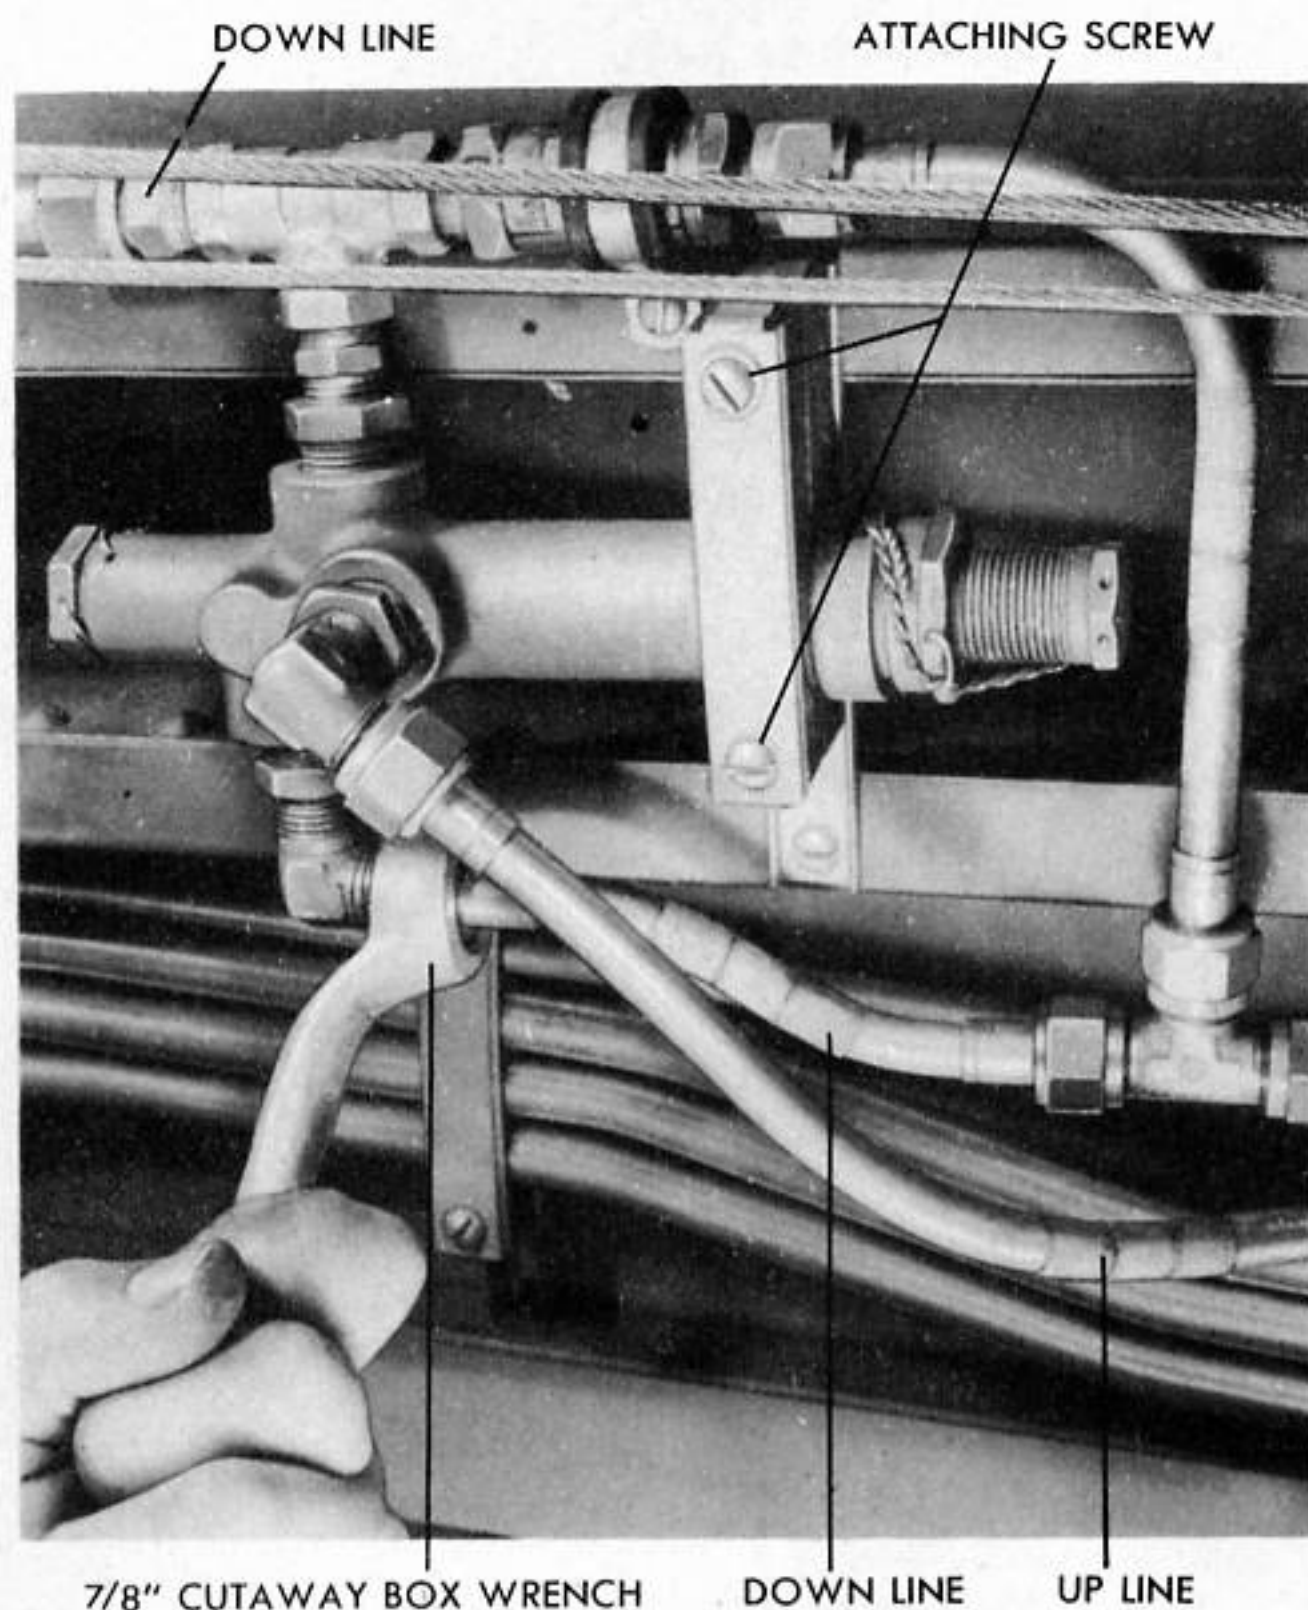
REMOVING WING FLAP RELIEF VALVE
